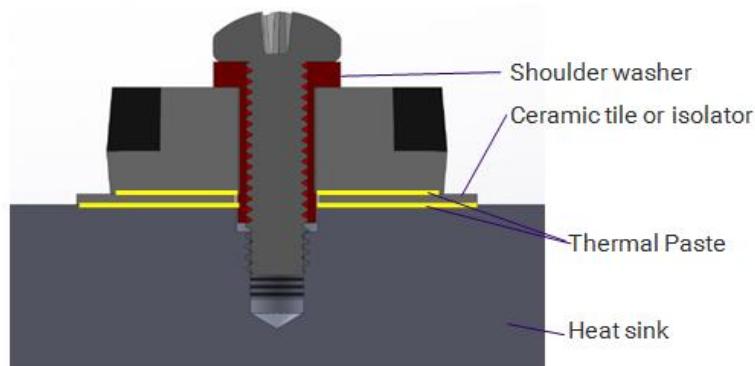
Cross Section Mounting View with the Insulating Shoulder Washer.
